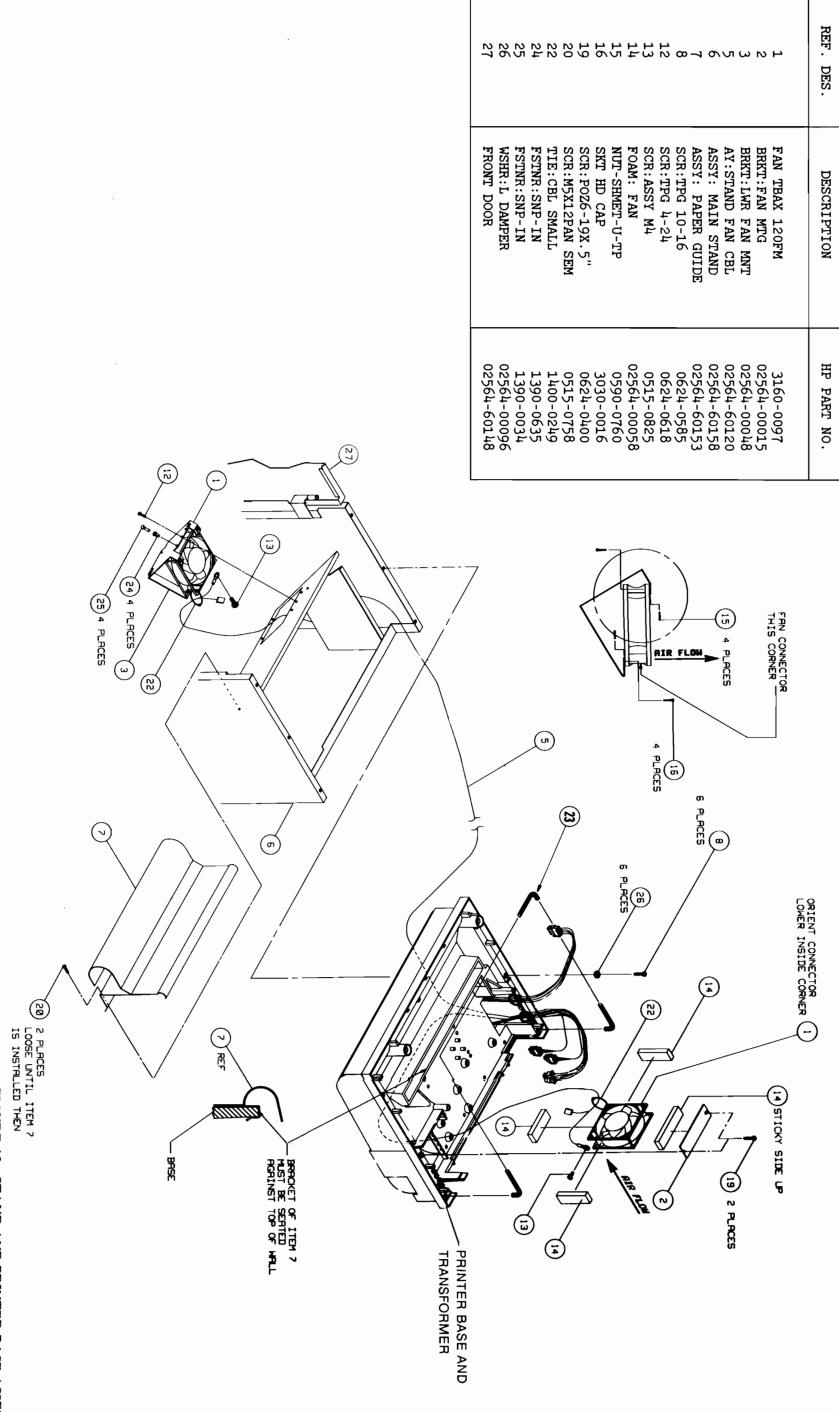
STAND AND PRINTER BASE ASSEMBLIES
